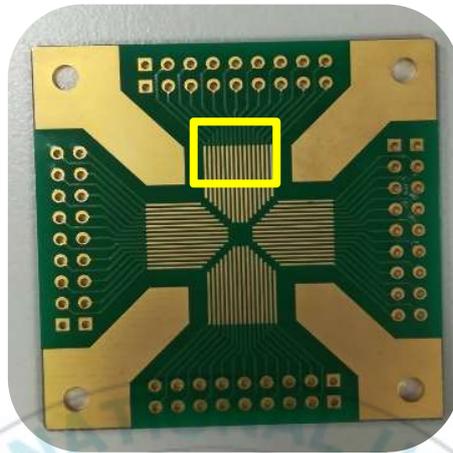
Sample PCB for Acoustic scanner inspection
